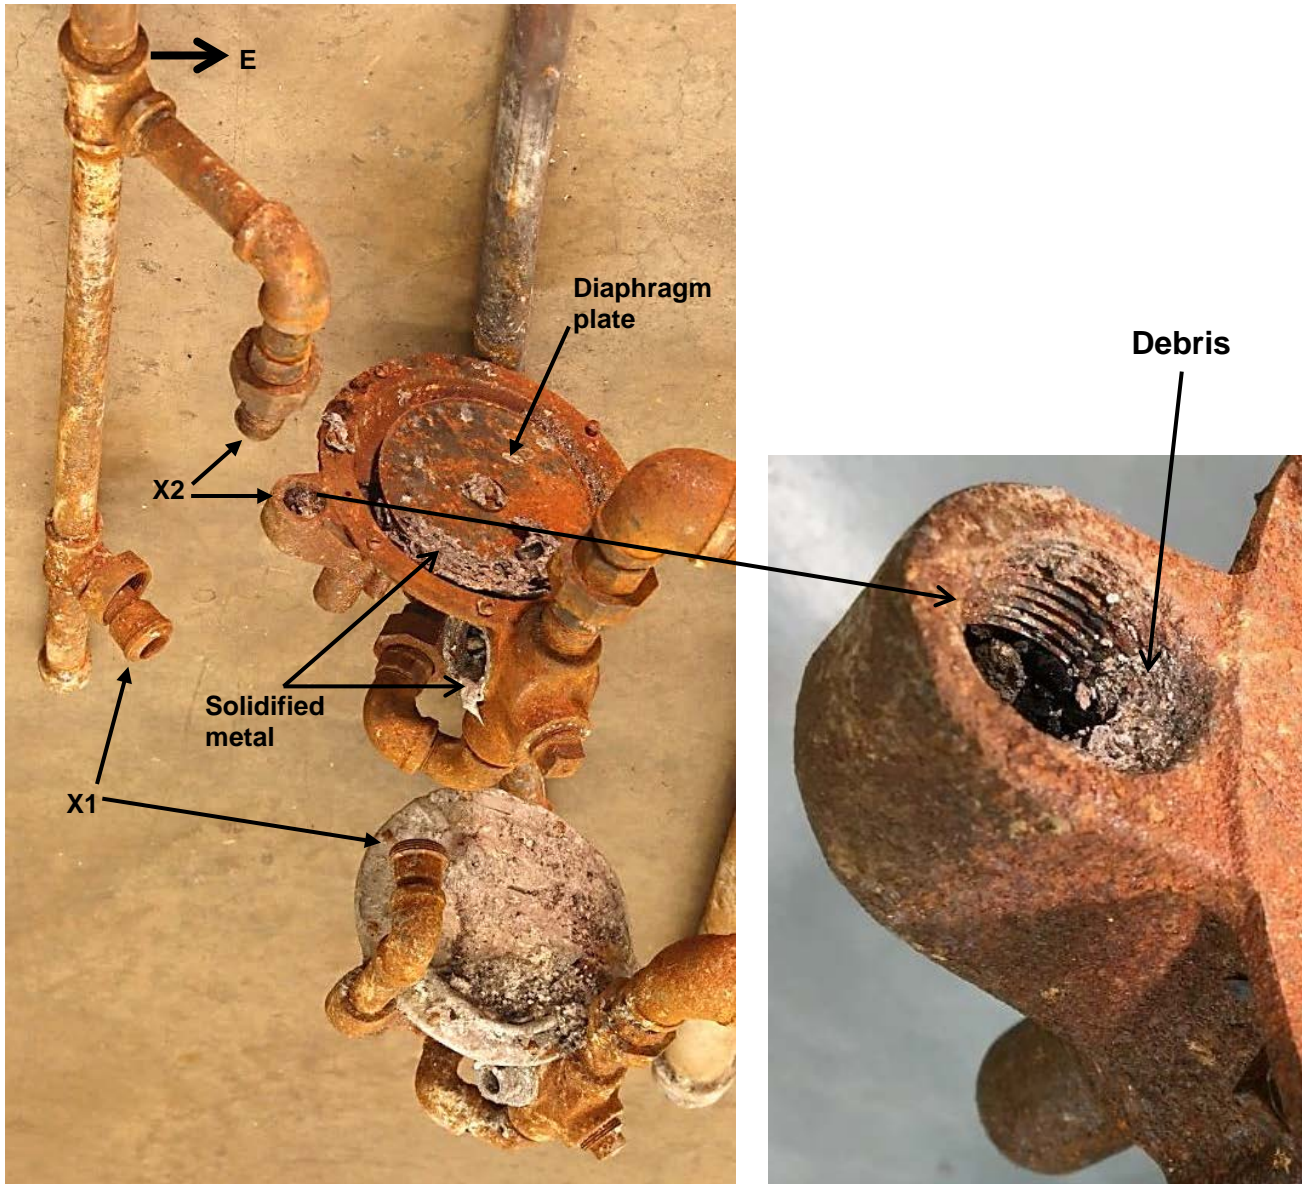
View of the internal threaded portion at the vent port of the upper gas regulator assembly.
